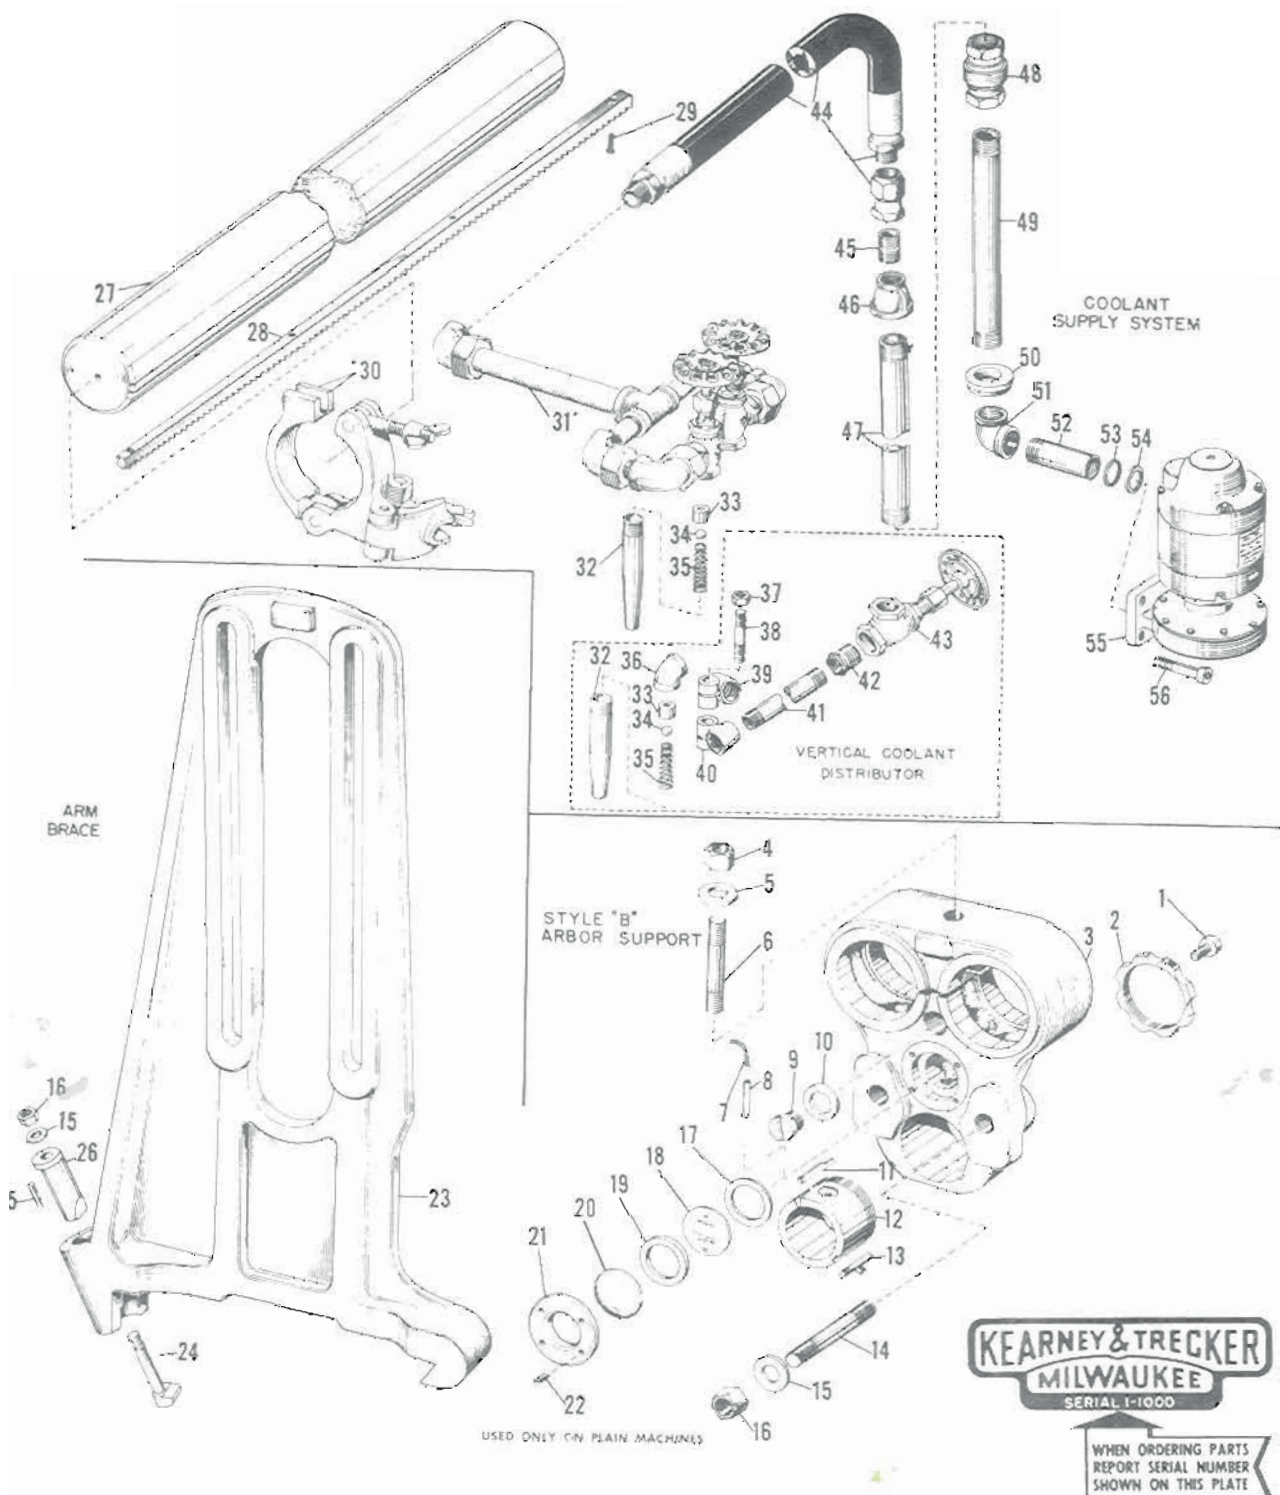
COOLANT SUPPLY SYSTEM, STYLE B ARBOR SUPPORT AND ARM BRACE
